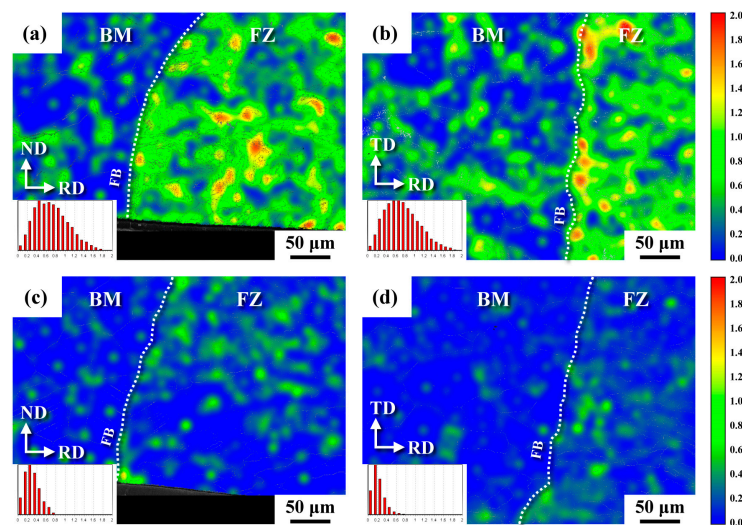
Strain maps around the FB of the (a,b) 304 weld and (c,d) 316 weld. (a,c) cross-sectional views and (b,d) top views.
